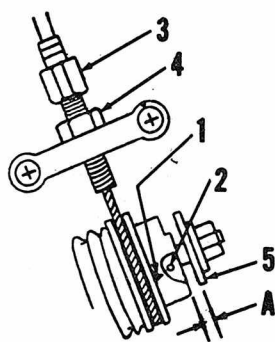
Clearance (A) between adjusting pulley and adjusting plate should be at least 0.006 inch.
